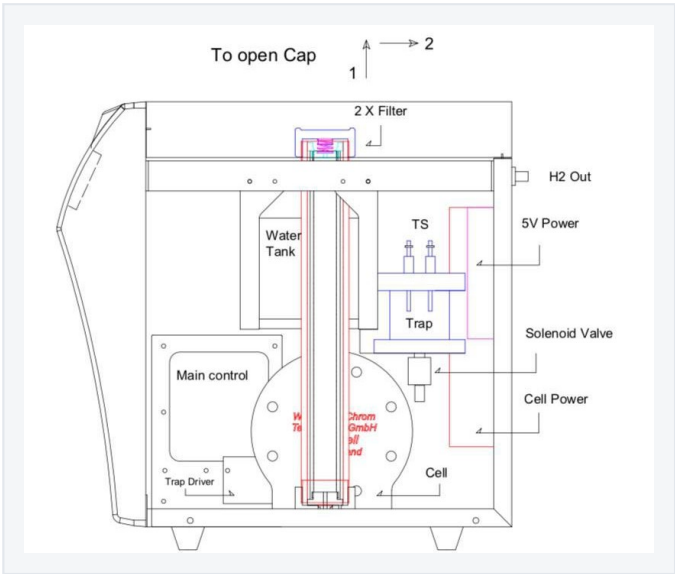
INTERNAL ARRANGEMENT, SIDE SECTION
